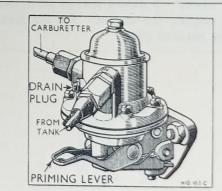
The A.C. petrol pump showing the priming lever and unions. Pull up lever to prime.
